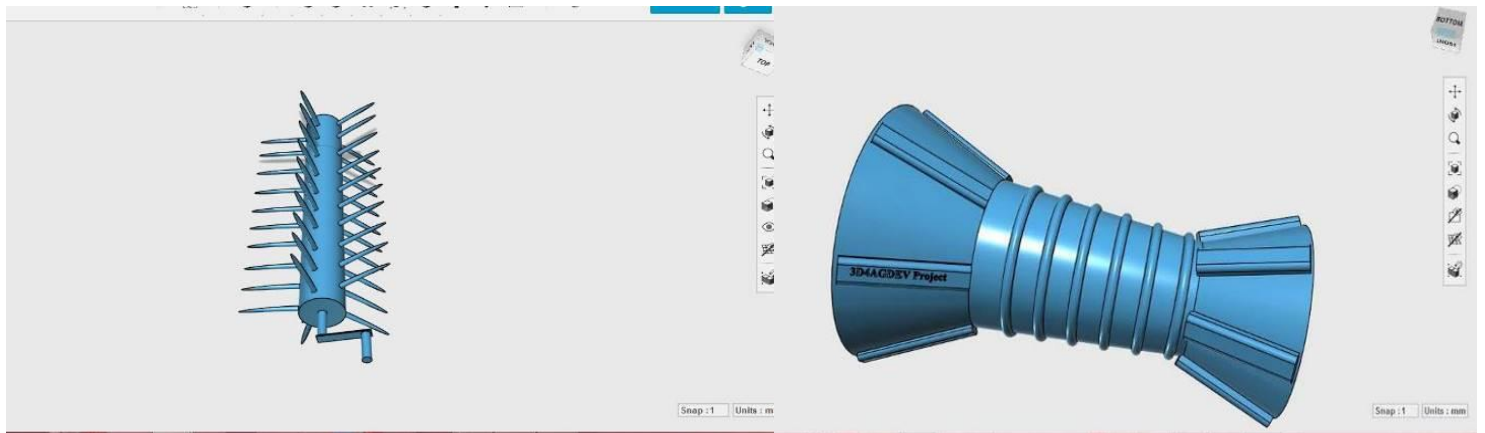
3D Render of Designed Maize Sheller Blade & Hand-Held Maize Sheller
